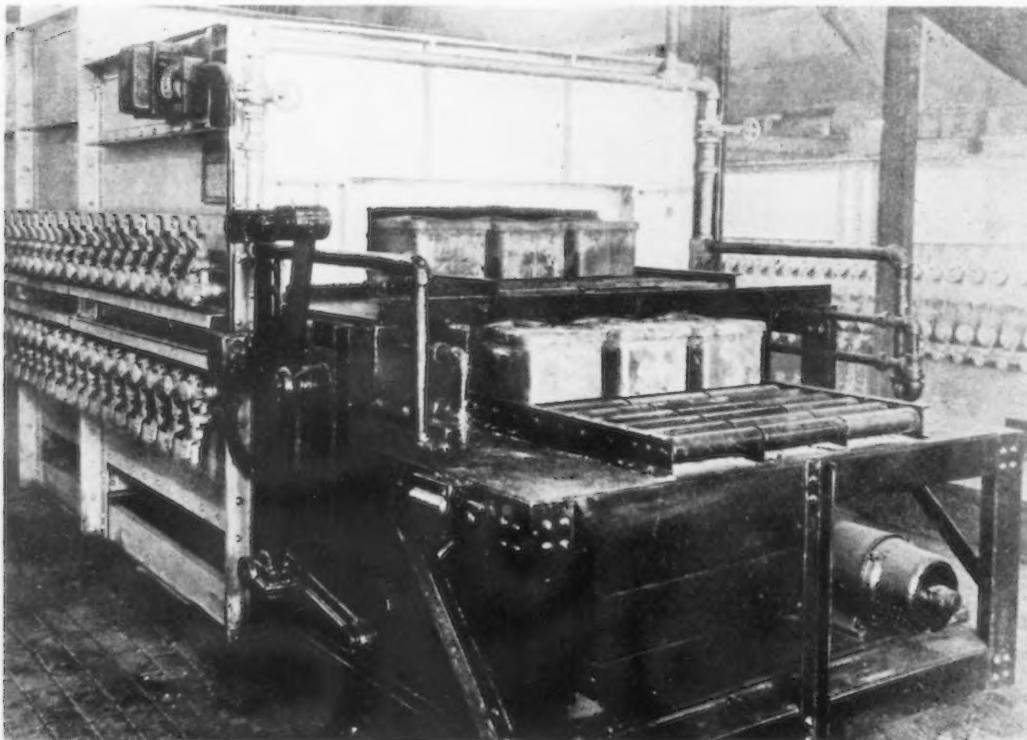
A double-deck roller hearth furnace for carburizing wrist pins. The double-deck is resorted to save space.
